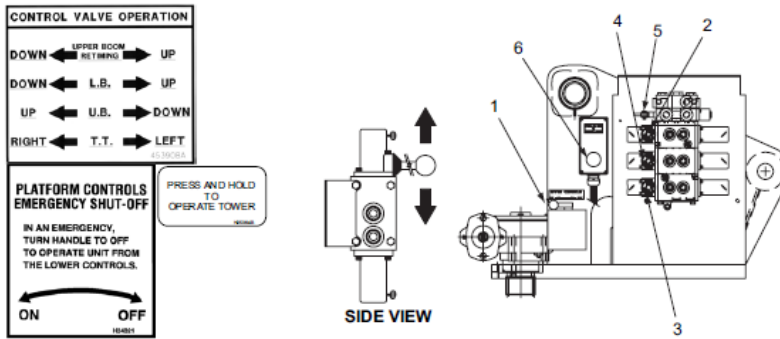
and 2 illustrate the two versions of lower controls that could be installed on the unit.
